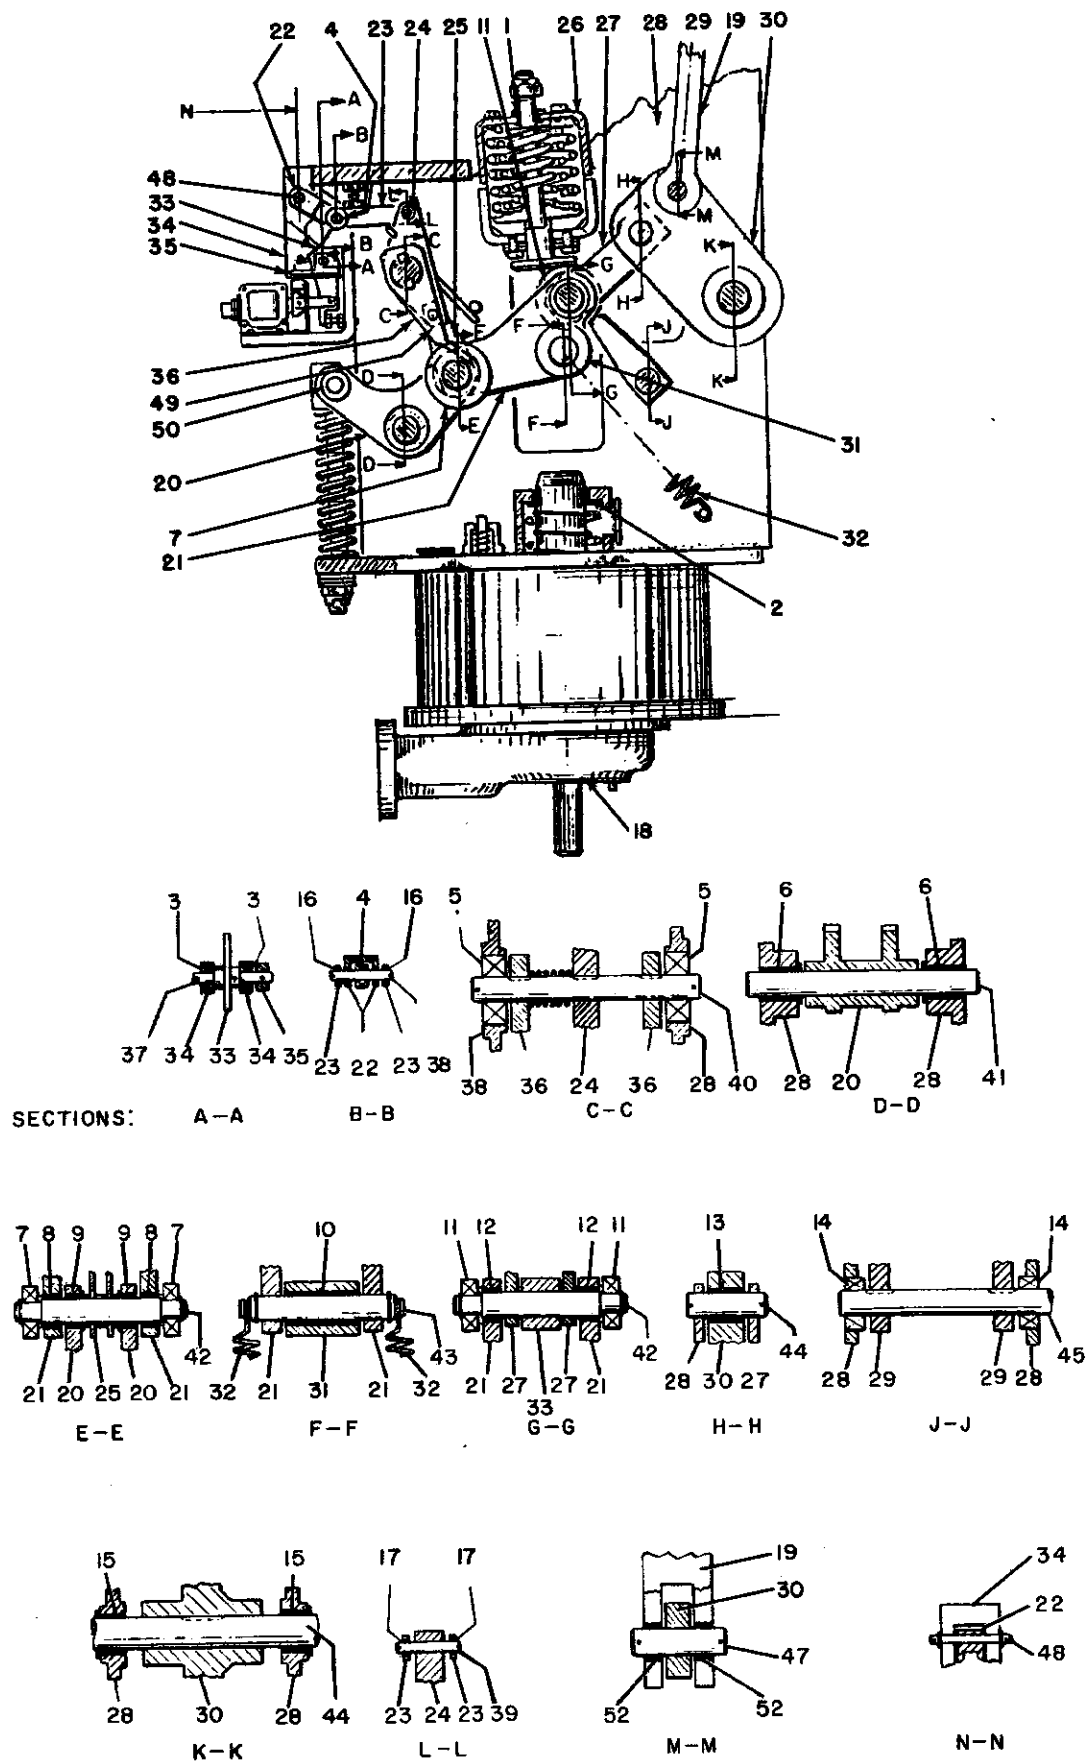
Bushing and bearing locations of mechanism (for MA-13-8 and MA-13-8A)
